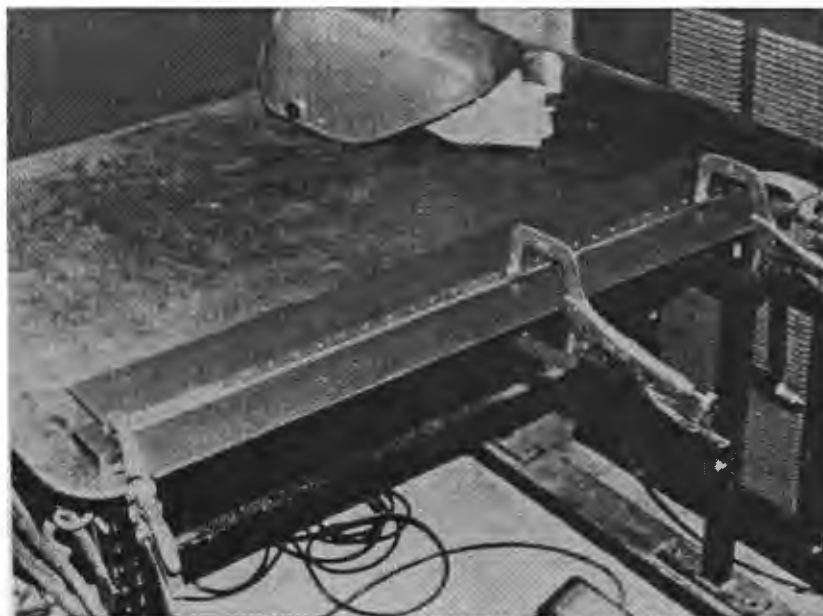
Photograph showing plug weld assembly at Aerotek Welding.
